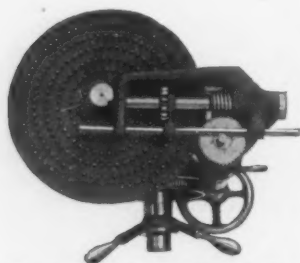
Top View of the Spindle Feeding Mechanism.
